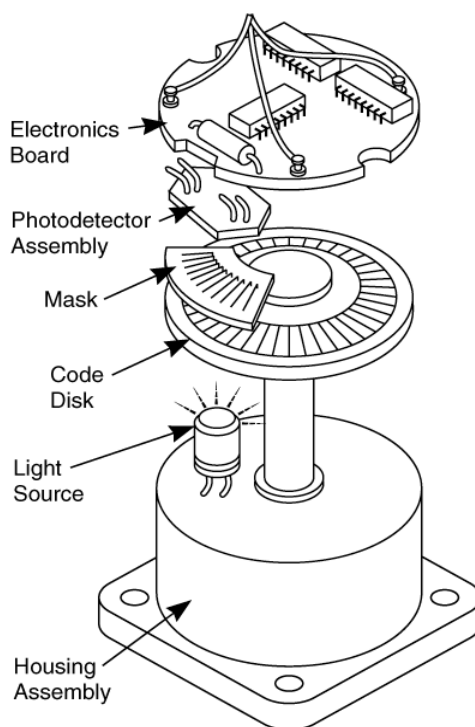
Example of a rotary encoder attached to robotic arm servo motor
